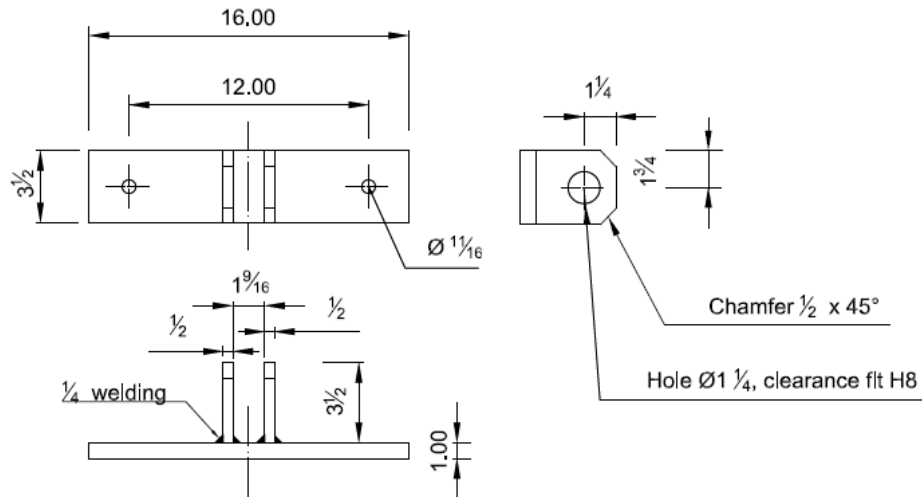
Steel plate with predrilled holes B2, unit (in.)
